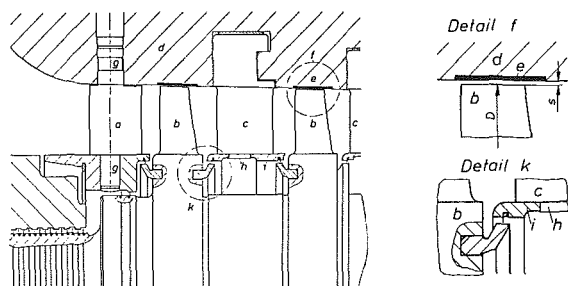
Geheiz compressor (inlet section): (a) inlet stator blades; (b) rotor blades; (c) stator blades inside compressor; (d) stator blade carrier; (e) lining; (f) detail of rotor blade clearance; (g) adjusting journal; (h) grooved journal; (i) internal ring; (k) detail of labyrinth
